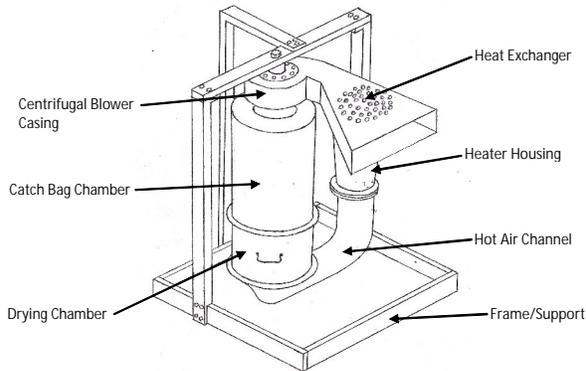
Isometric (Pictorial) drawing of the dryer showing some of its components.
